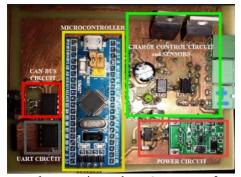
Designed BMS control card 3.1. Pcb Design with Using Smd and Through Hole Technique
